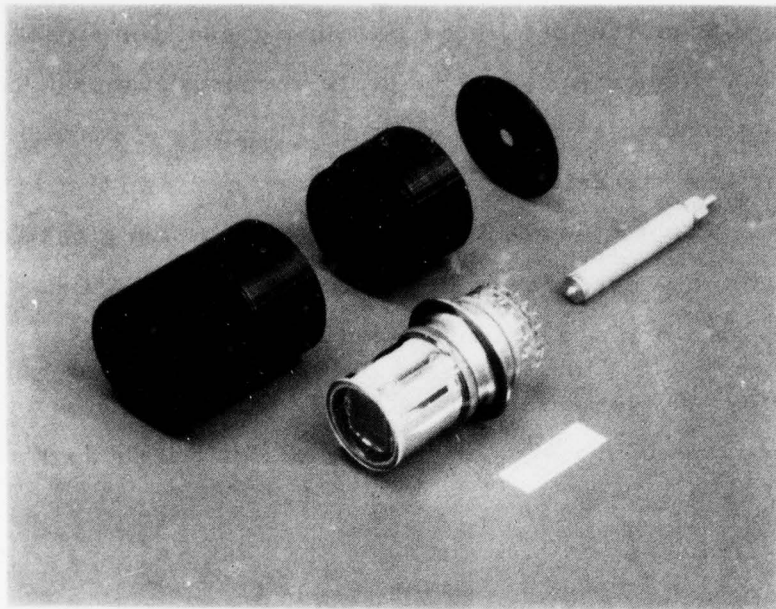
shows an exploded view of the detector assembly. Figure 6-4 shows an assembled view with the four cables attached which lead to the preamplifier.
